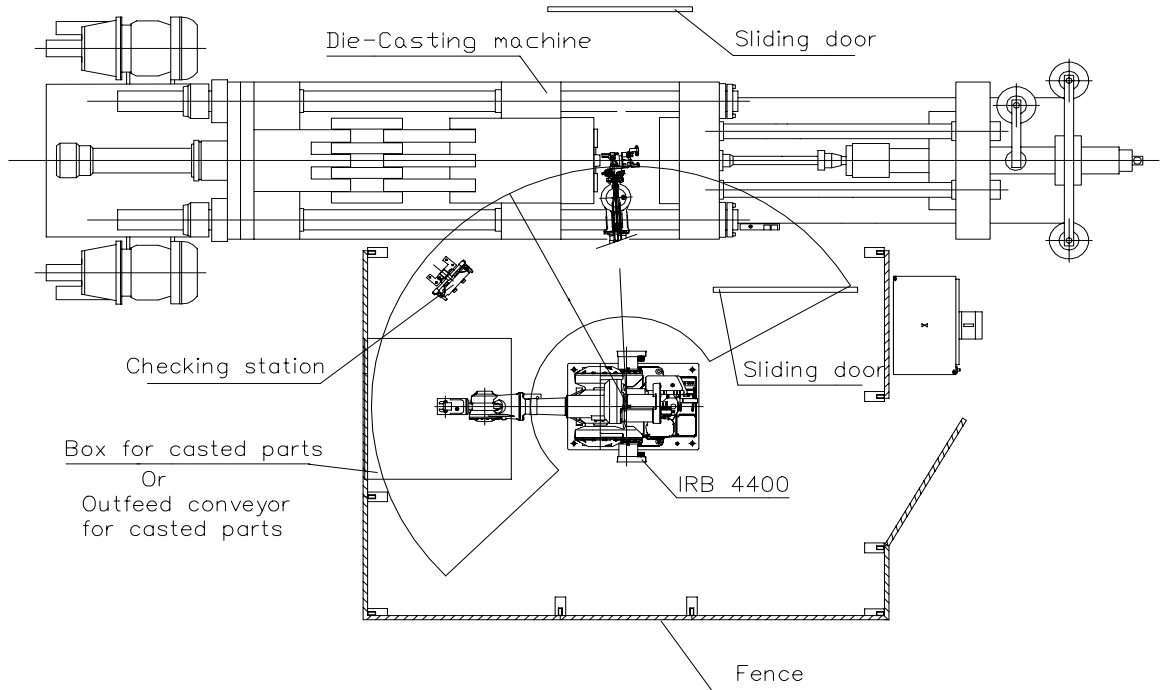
Die-casting machine with a robot using the RobExtractSpray tool system.
